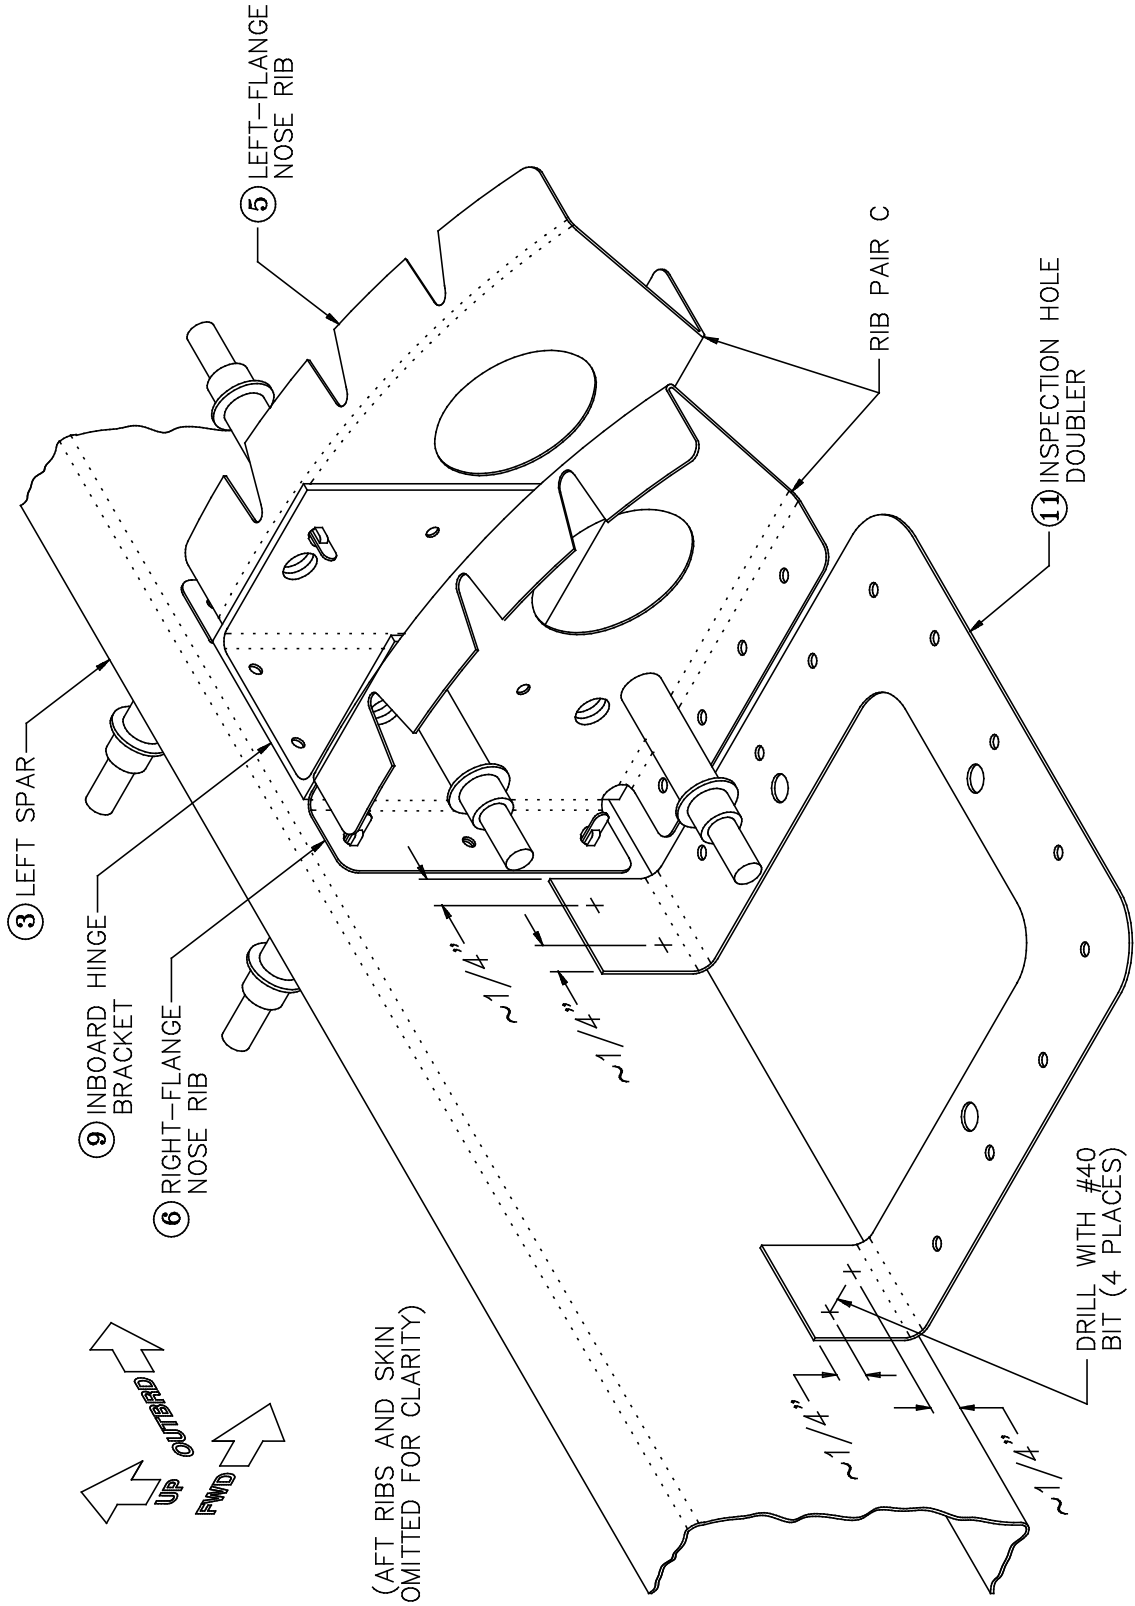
Drilling the Spar Web/Inspection Hole Doubler Rivet Holes
